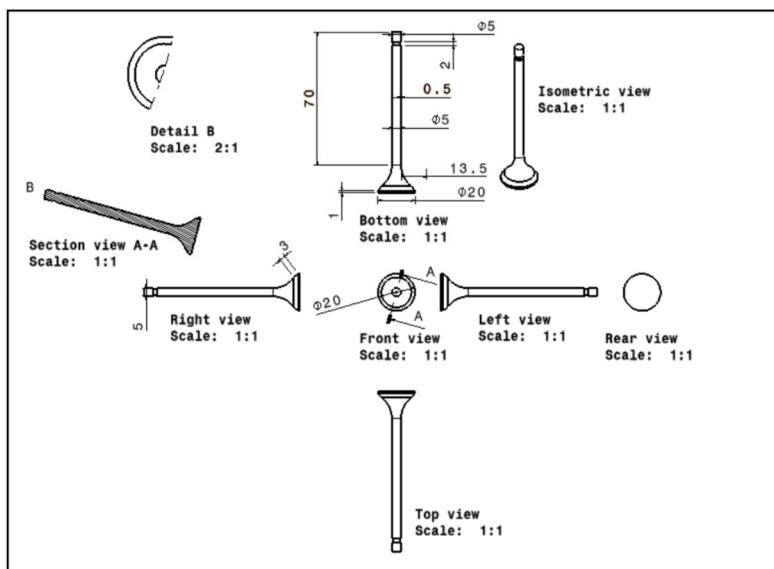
Optimized exhaust valve design of 13.5 mm fillet radius
